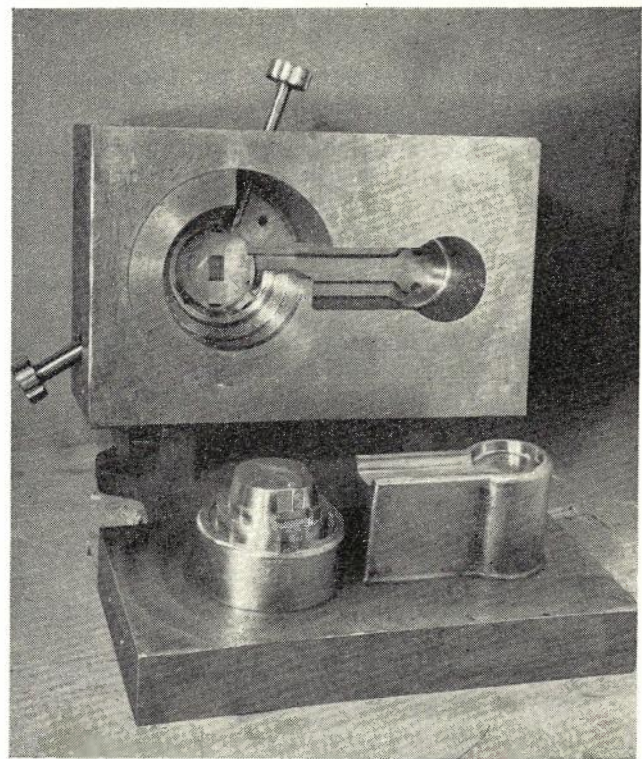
Dial Housing Component. Top and bottom forces—complete mould.
